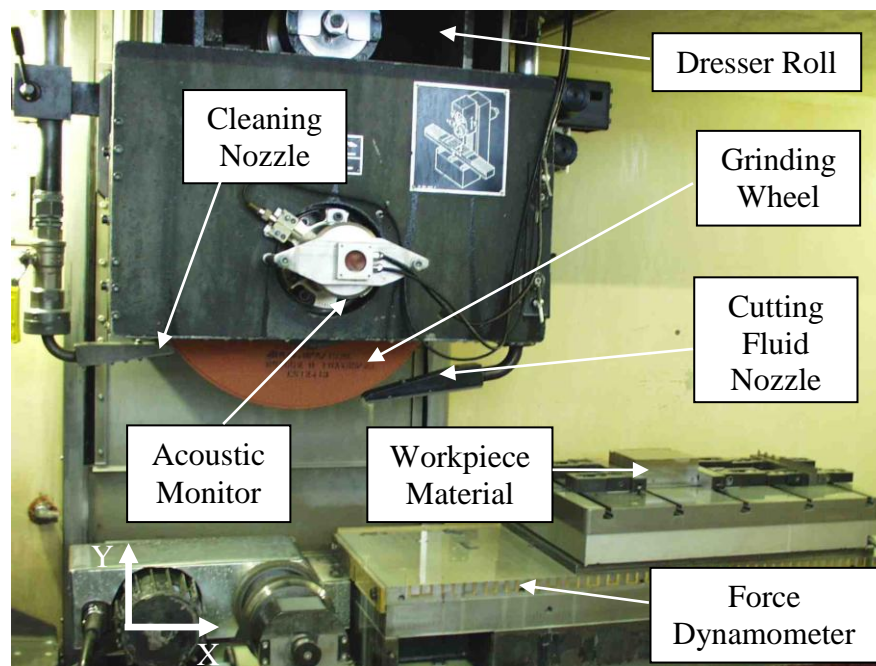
Internal view of Blohm Profimat 412 grinding machine envelope including cutting fluid nozzle and dynamometer setup.
